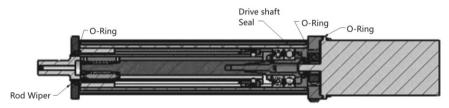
IP65 Integrated Motor Mount Unit Sealing Details
